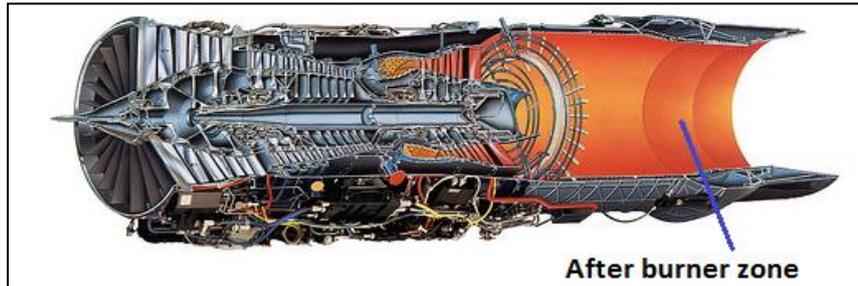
Sectional view off a Pratt & Whitney Turbojet Engine with after burner
